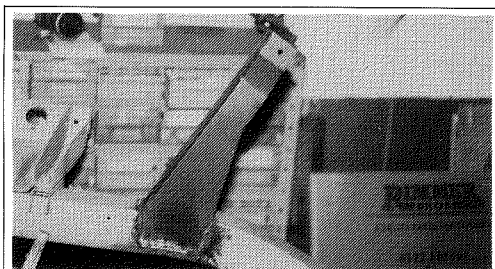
A good seam weld was then applied all round. To finish off these welds were lightly smoothed off with the grinder.
